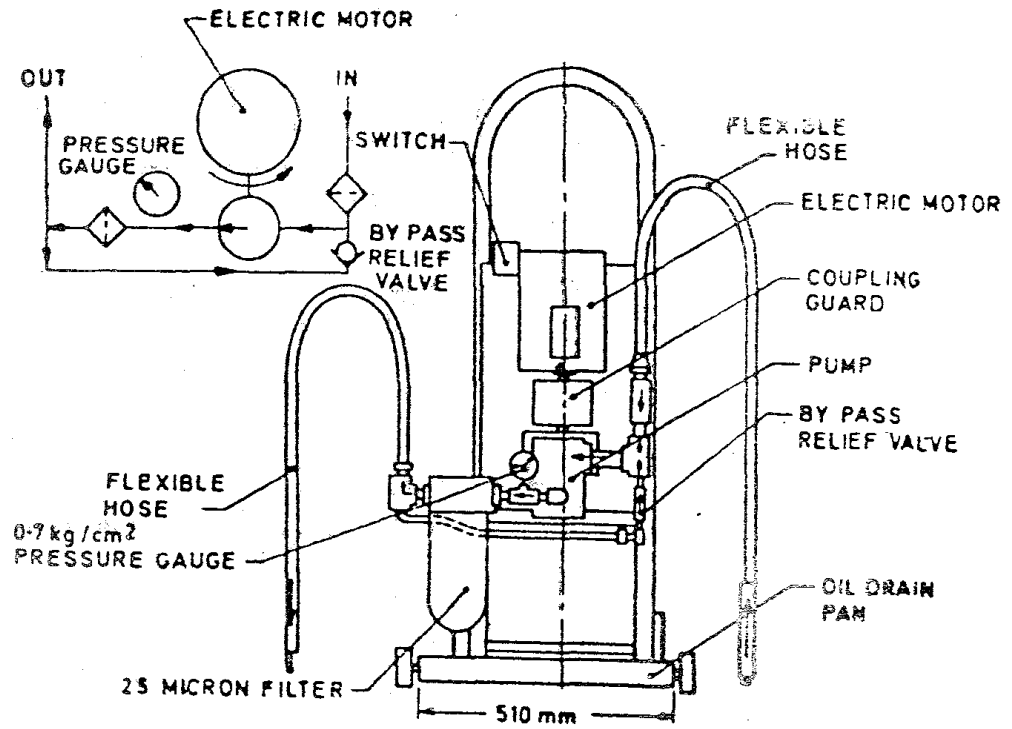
MOTORIZED OIL TRANSFER PUMP ( TYPE B )
